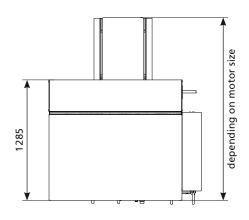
KME3* with opened machine hood and opened front bearing cover
